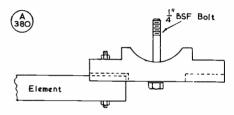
How standard TV-aerial type insulators can be used to mount the beam elements and hold them to the boom, which fits over the  $\frac{1}{2}$ in. bolt — and see Fig. 5 for an end view.
